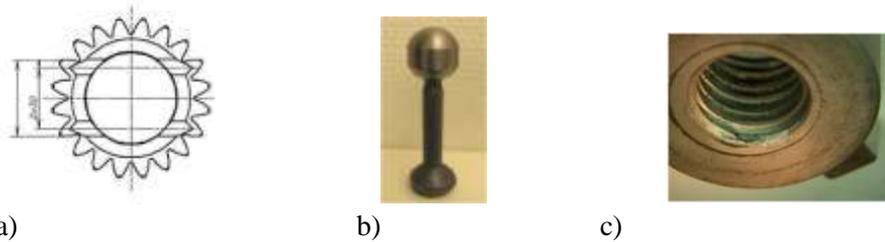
Demonstrators a) gear wheel b) piston c) internal threads
